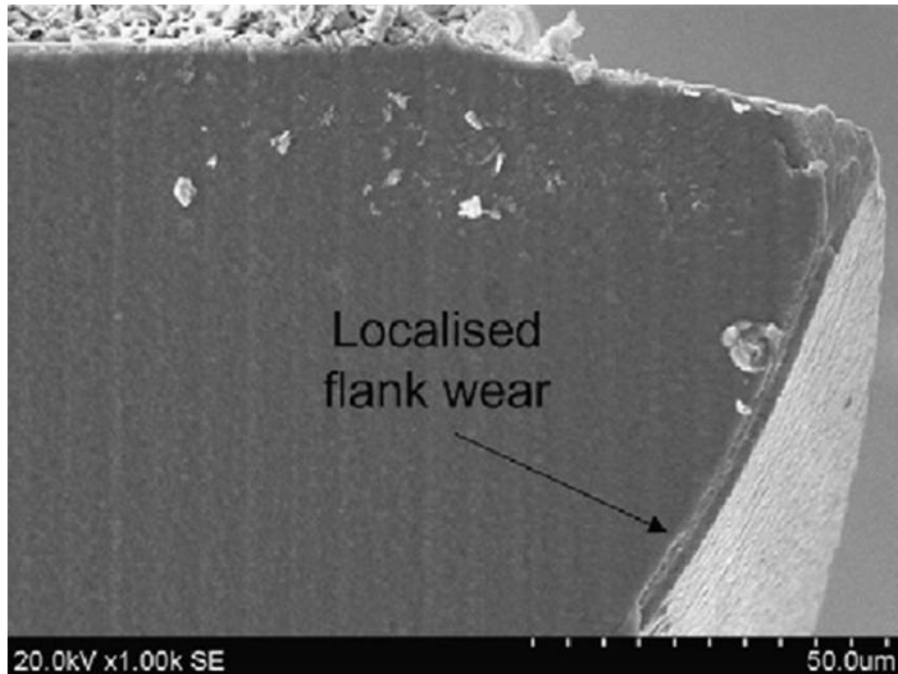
Flank wear in a TiAlN coated tool [1].
